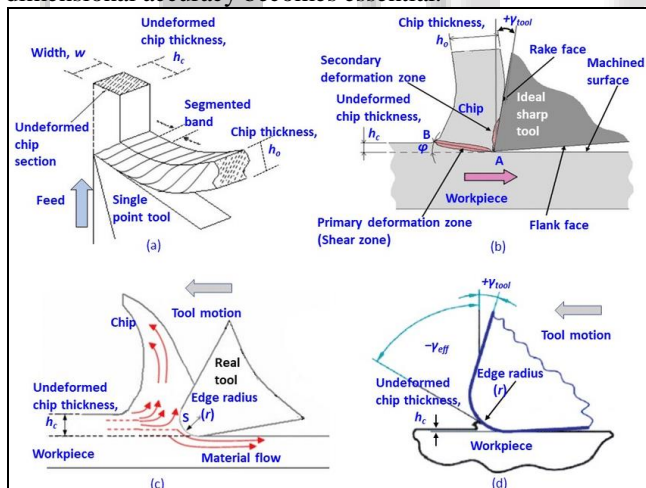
(a) 3D view of orthogonal cutting with single-point cutting tool [28] (b) 2D view of macro machining model [29] (c) 2D view of micromaching model [30] (d) 2D view of ploughing in micromaching
